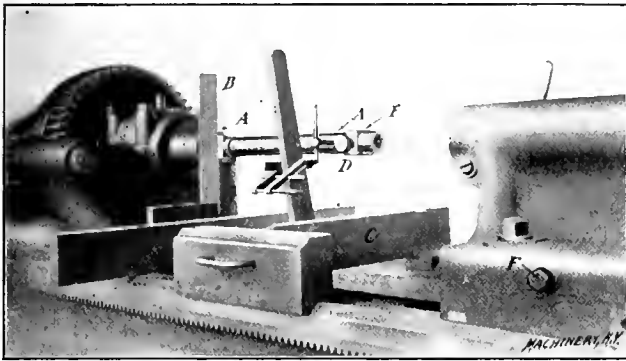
Special Form of Test Bar for Aligning Head- and Tail-stock. Plane Surfaces are used for Testing Parallelism, and Cylindrical Surfaces for Testing Concentricity
